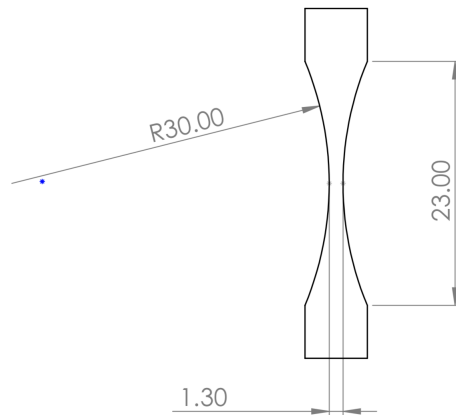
Drawing of the film specimen used for *in situ* synchrotron tomography experiments. Film specimens using this geometry were cut from a film with thickness 0.100 mm. Dimensions are in mm.
